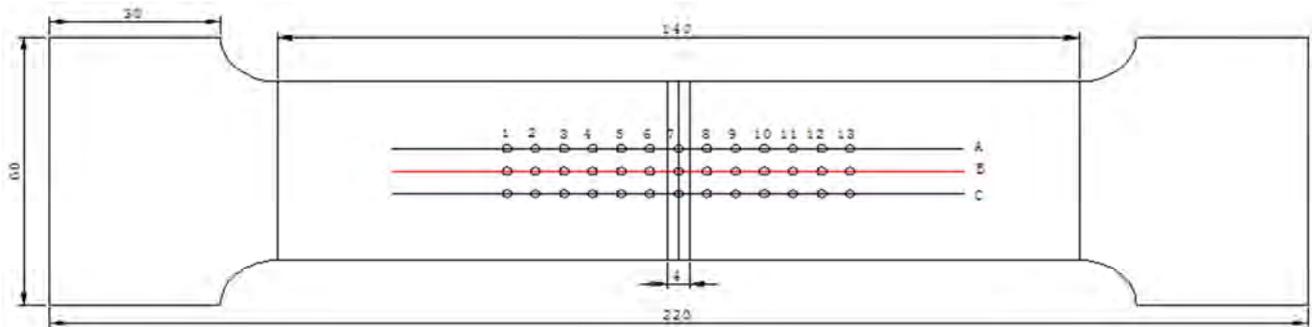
Q235B structural dimensions of steel butt welds (unit: mm).
